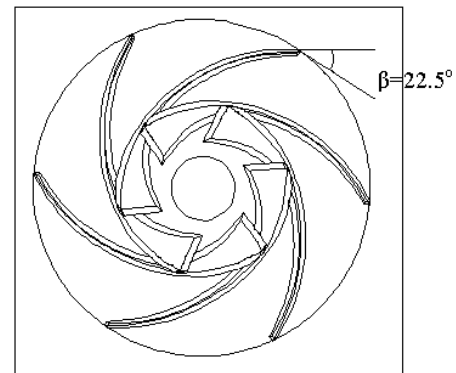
Impeller with blade outlet angle of  $22.5^\circ$
